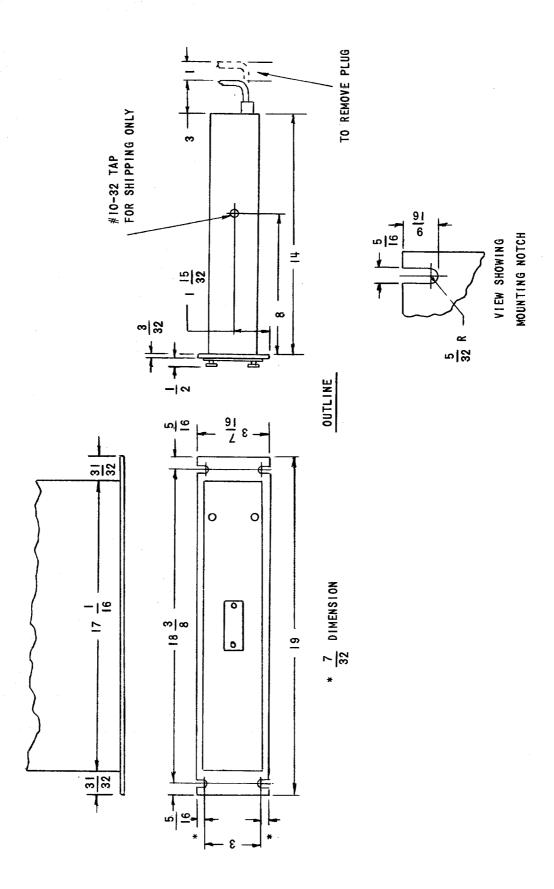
(0165A7660-6) Outline And Mounting Dimensions For Logic Unit (2 Rack Unit)
